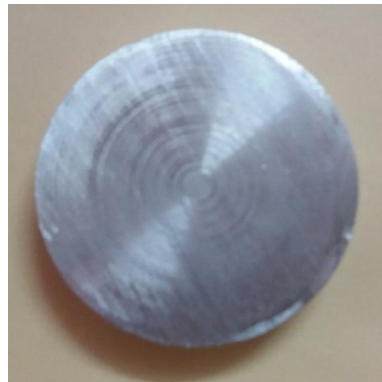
(a): Specimen Casted for Hardness test of Al6061+0%SiC.
